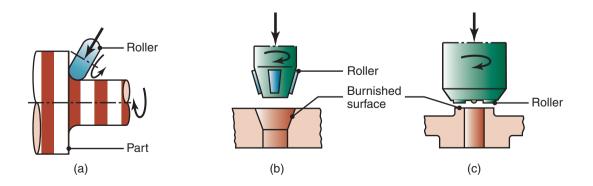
Burnishing tools and roller burnishing of (a) the fillet of a stepped shaft to induce compressive surface residual stresses for improved fatigue life; (b) a conical surface; and (c) a flat surface.
